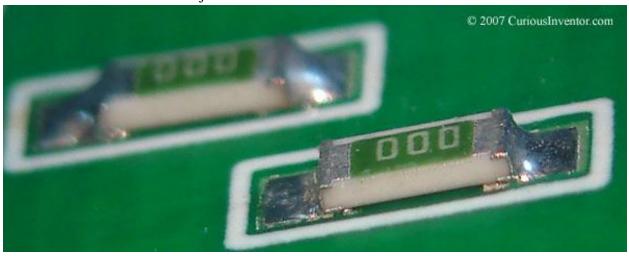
Example of a good solder joint for an 0805 resistor - Curious Inventor
